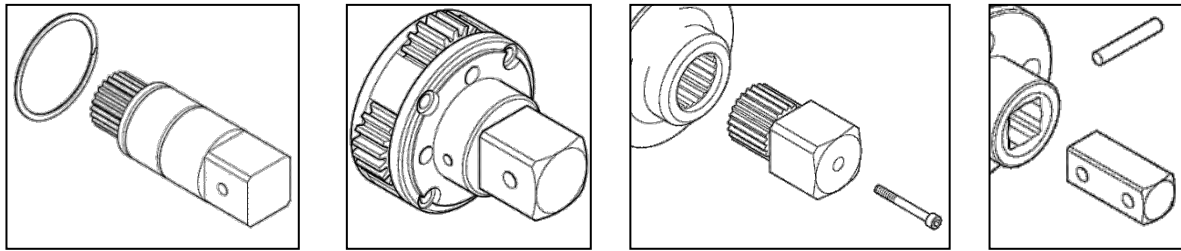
Drive square fixing (left to right): Pin, Carrier Assembly, Screw and circlip.
